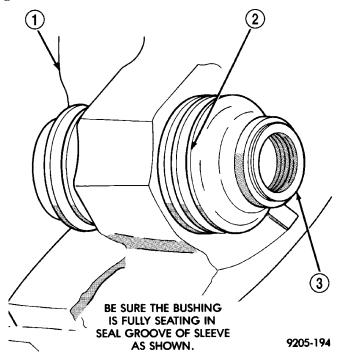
Correctly Installed Guide Pin Sleeve And Bushing
